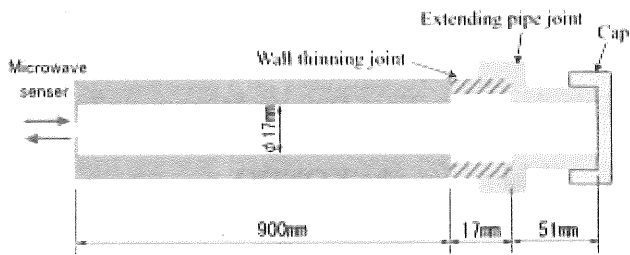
Model of a pipe with a wall thinning joint, extend pipe joint and a cap
